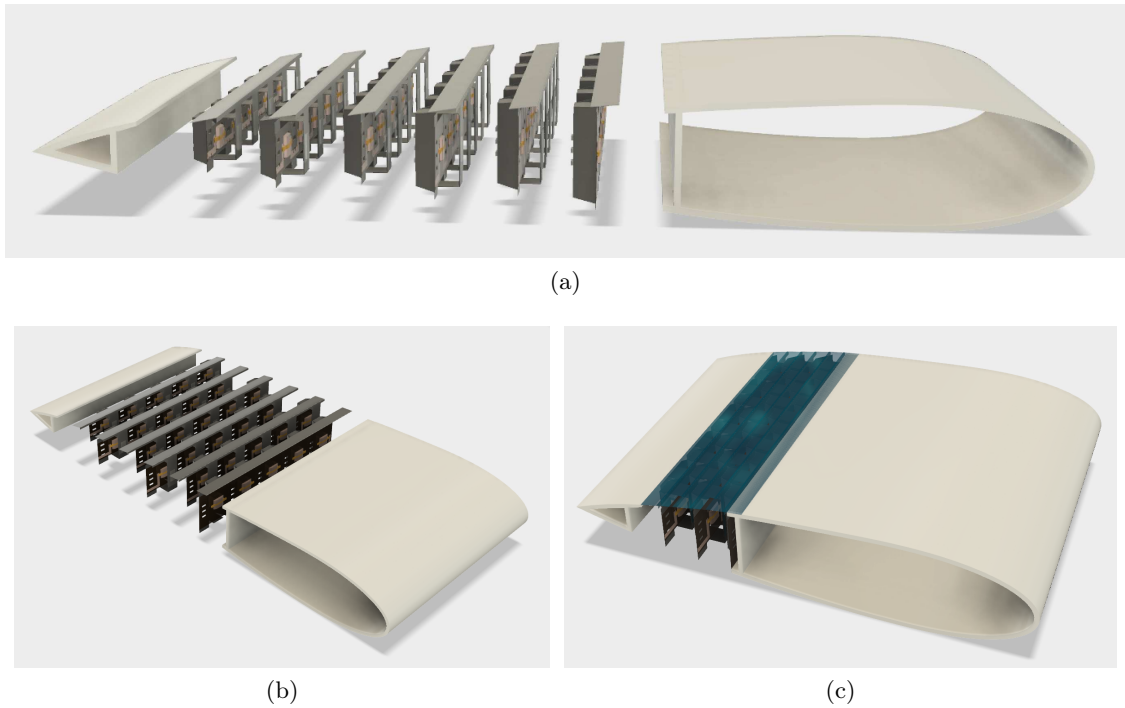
Traveling wave elements included near the  $3/4$  chord position of a foil. A) Exploded side view, B) Exploded perspective view, C) Assembled perspective view.
